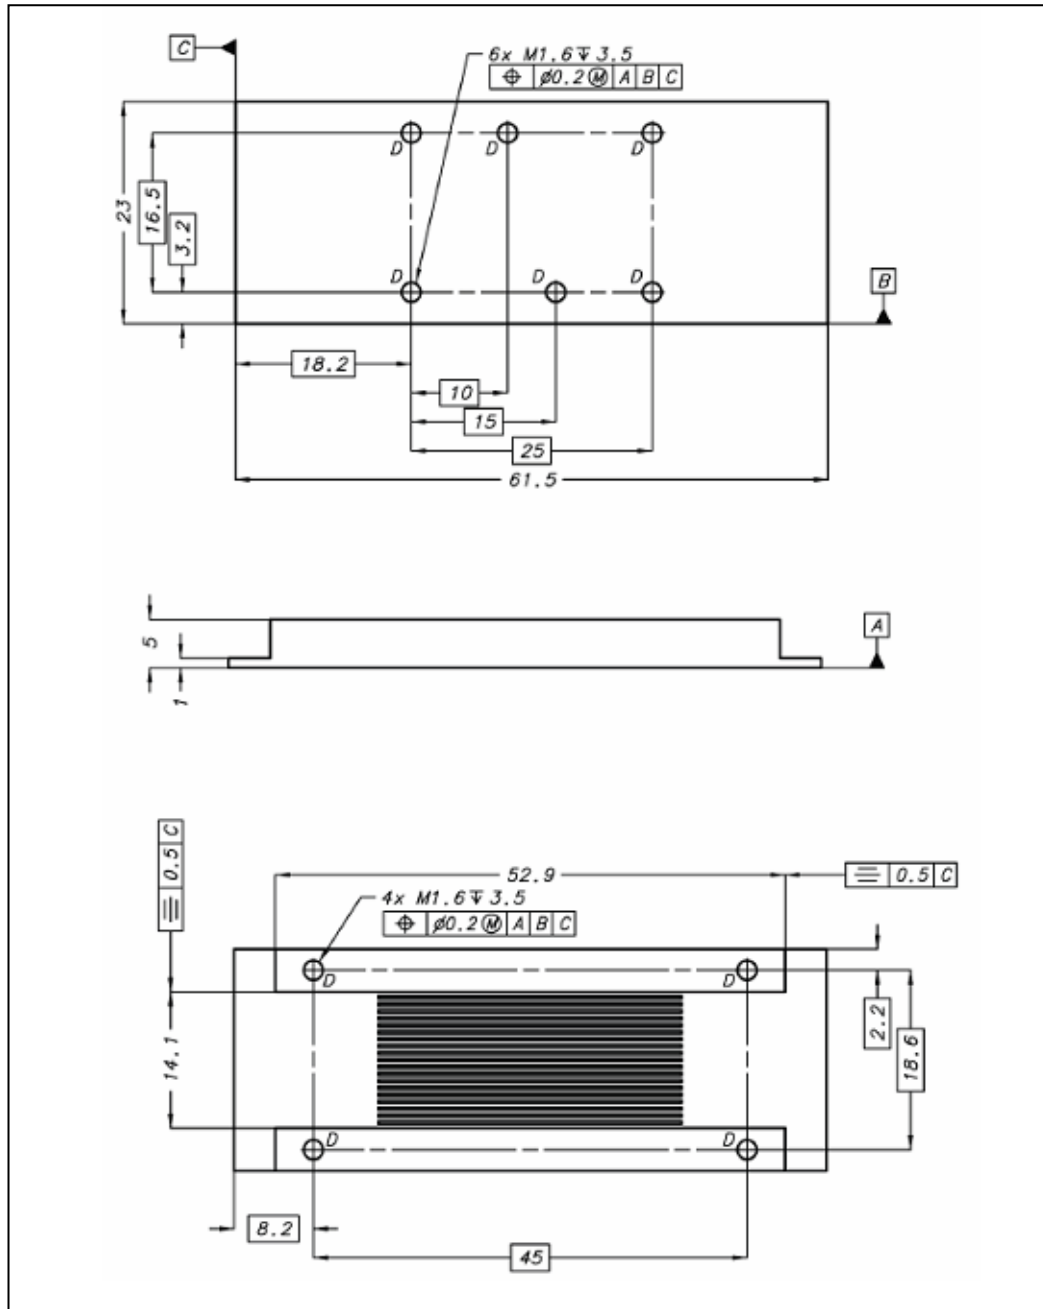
300  $\mu\text{m}$  heatsink body dimensions
